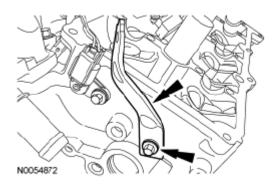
Locating Upper Intake Manifold Bracket Bolt Courtesy of FORD MOTOR CO.
